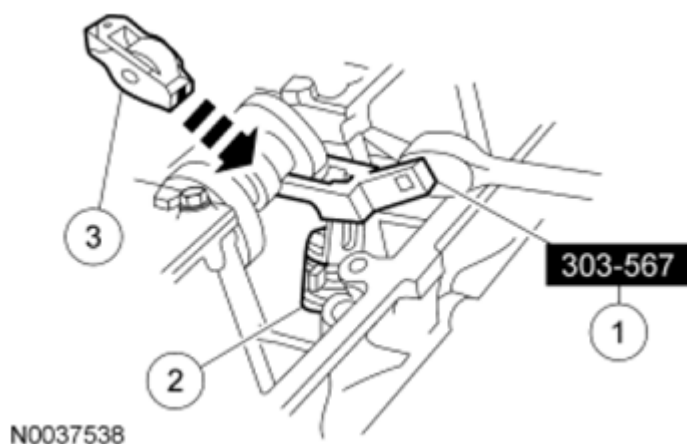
Locating Hydraulic Lash Adjusters
